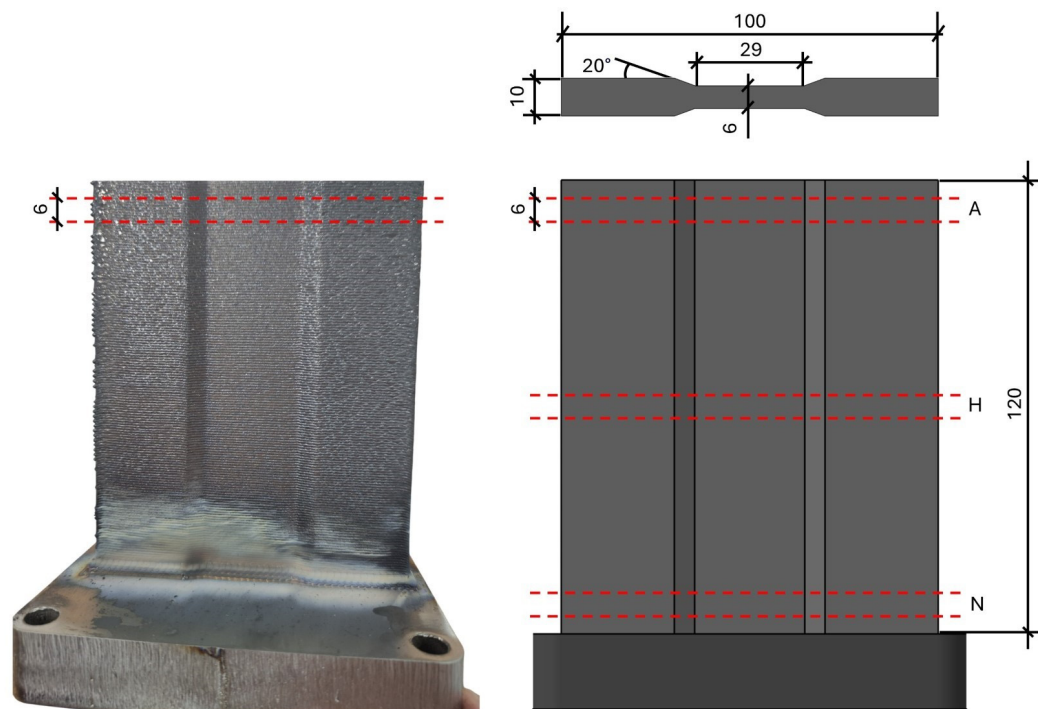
Sample manufactured for extracting specimens with the specified dimensions in the XY plane.
